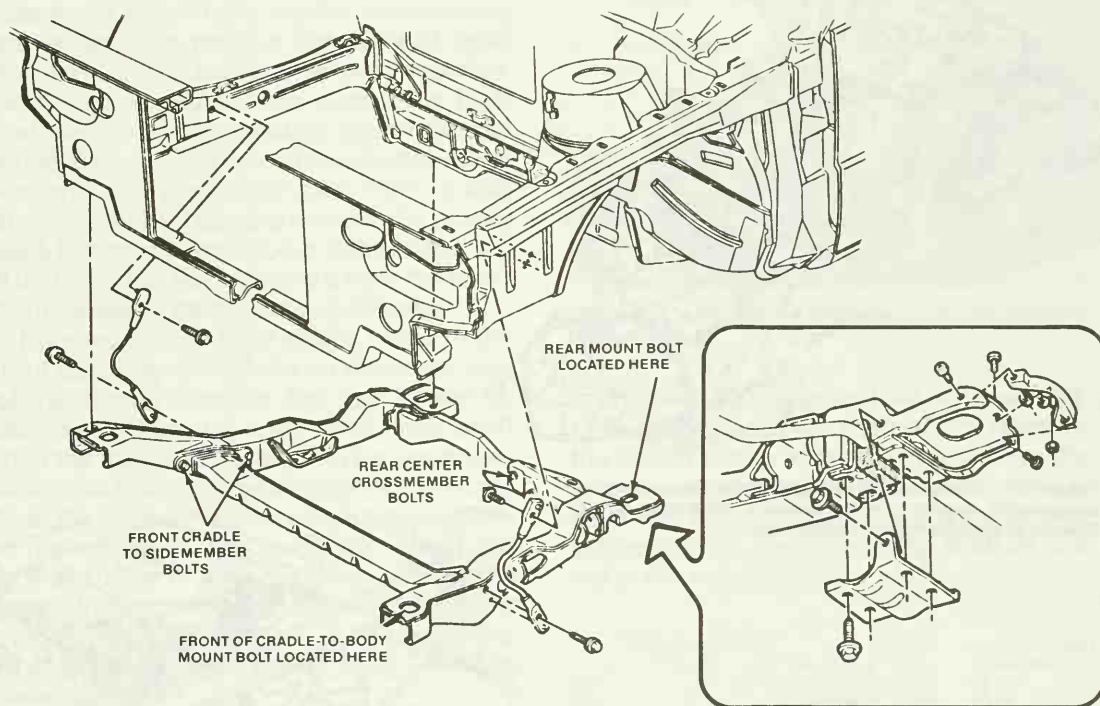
A removable subframe called a cradle supports the transaxle on many vehicles. (Buick Motor Division of General Motors Corporation)
